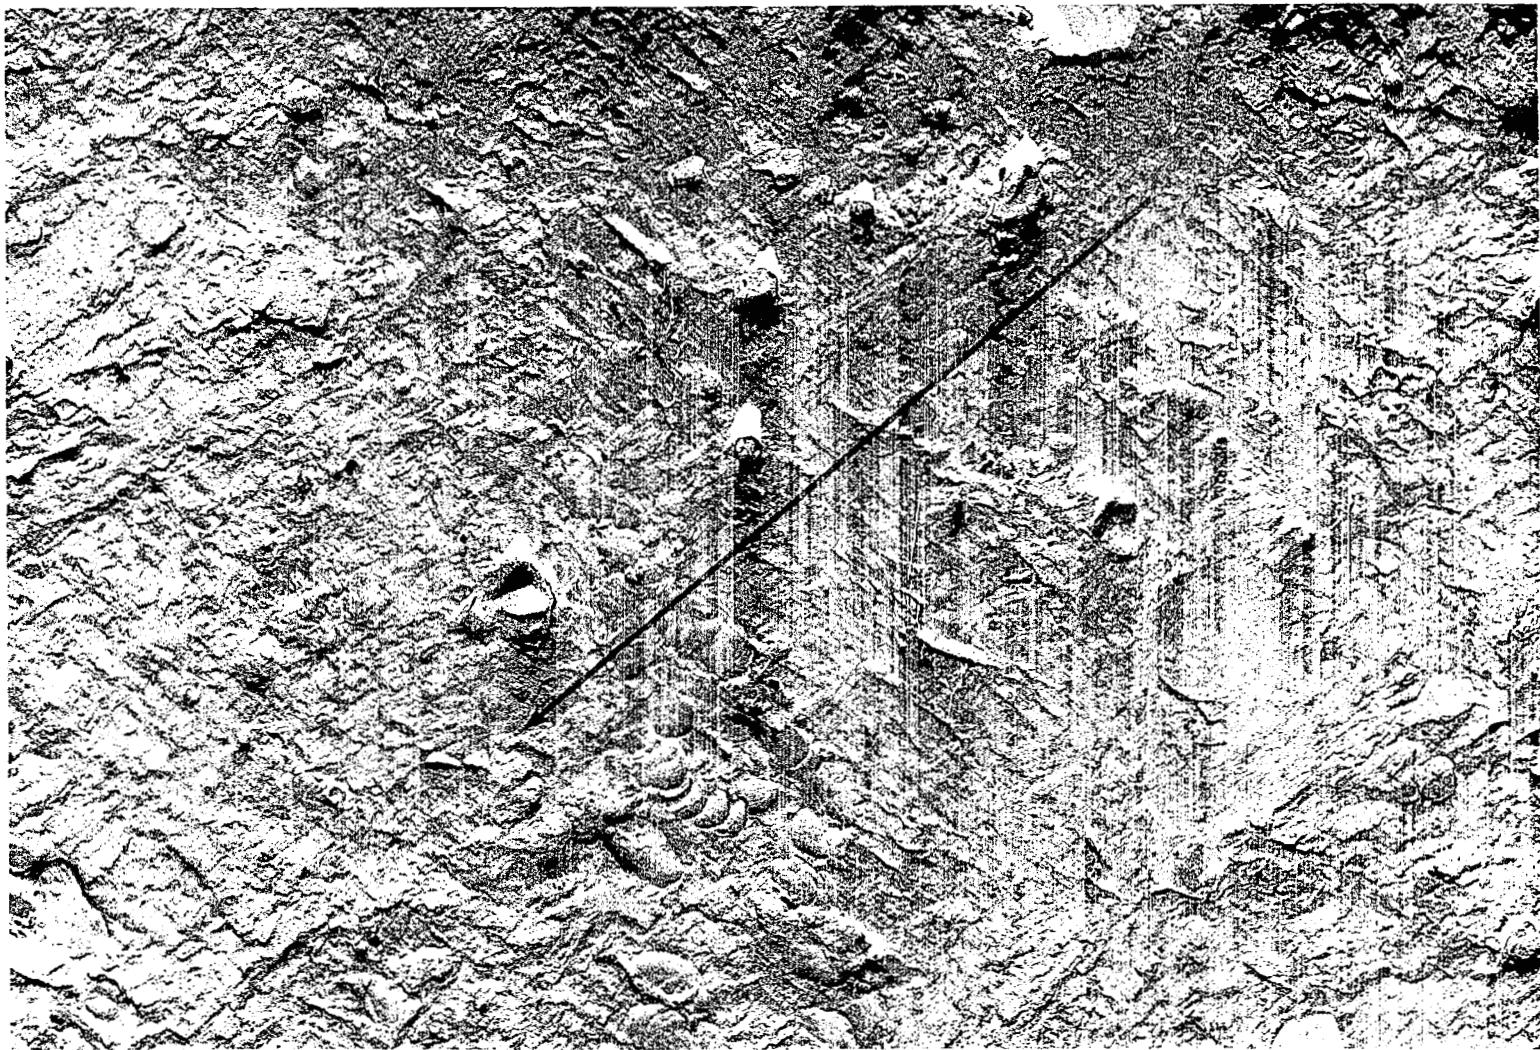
Example of Fatigue Striations Located Just Within Rubbed Area of ID Wall of Fracture Surface A (Arrow Indicates Crack Direction) (X12,000)
